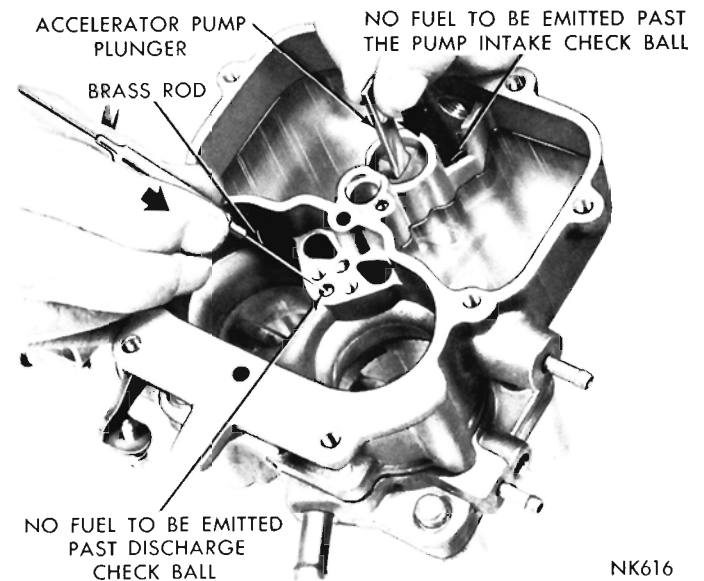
Testing the Accelerator Pump Intake and Discharge Balls Check
